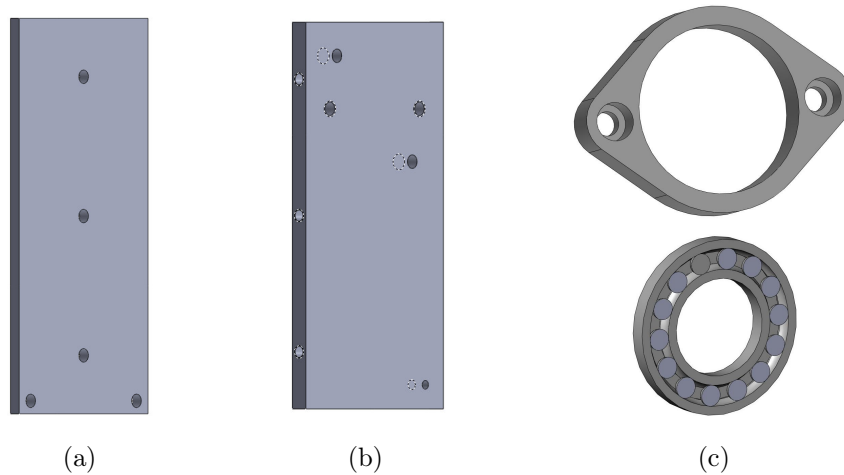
Aluminum plate (b) for mount bearings (c) and stabilizing plate (a)
